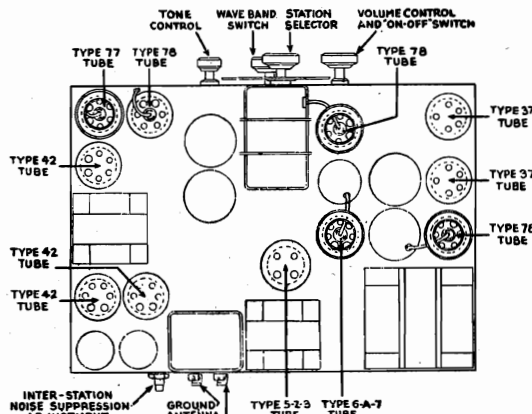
Top View of Chassis, showing Tube Locations, and Major Parts
